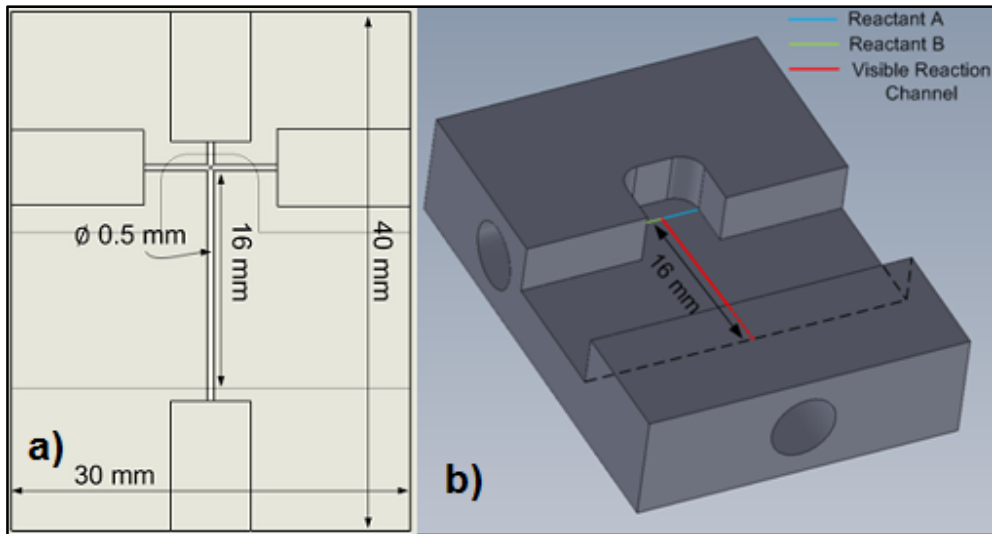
Micro-cross mixer with up to three inlets and one outlet: a) Two dimensional schematic containing the dimensions in millimeter and b) three dimensional representation of the reactor highlighting the mixing channel.
